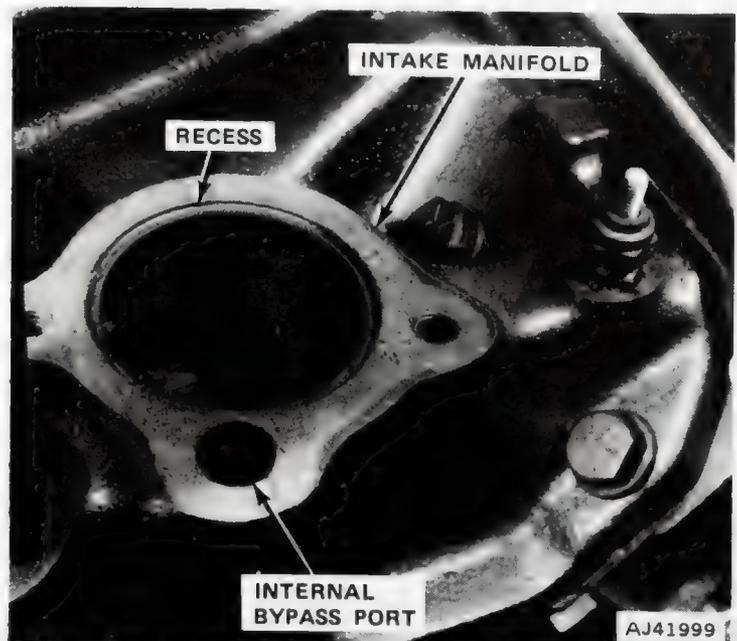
C-23 Thermostat Recess—Eight-Cylinder
